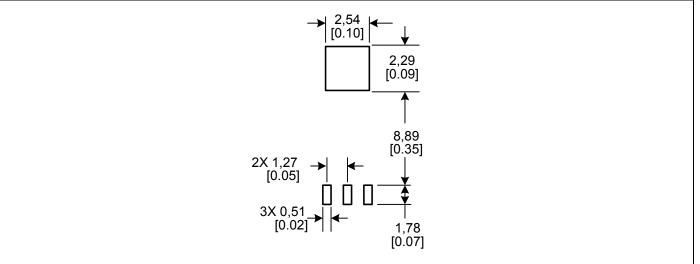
HIH-5031 Mounting Dimensions (For reference only. mm/[in])
